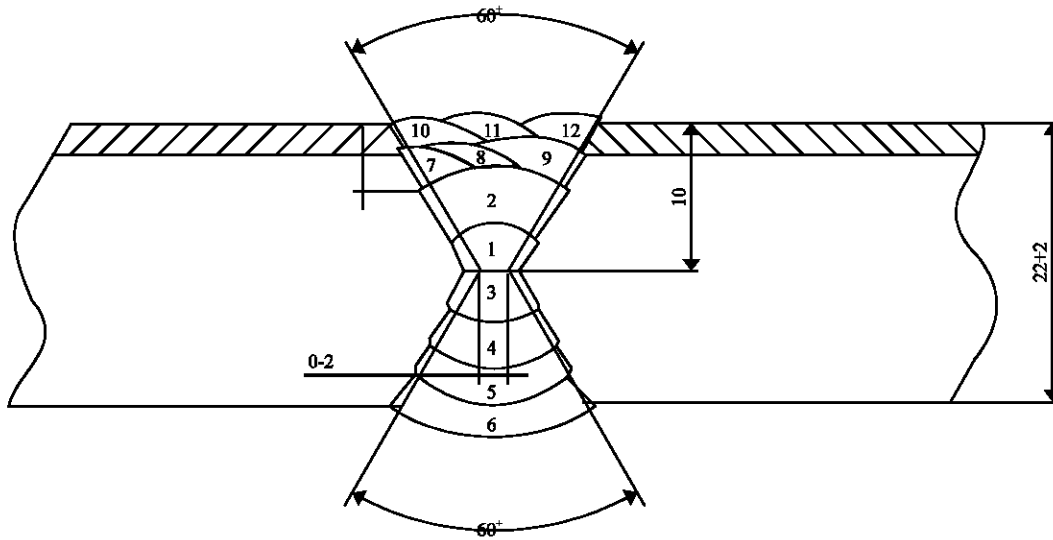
Groove shape and welding bead layout of the N06625 composite plate
